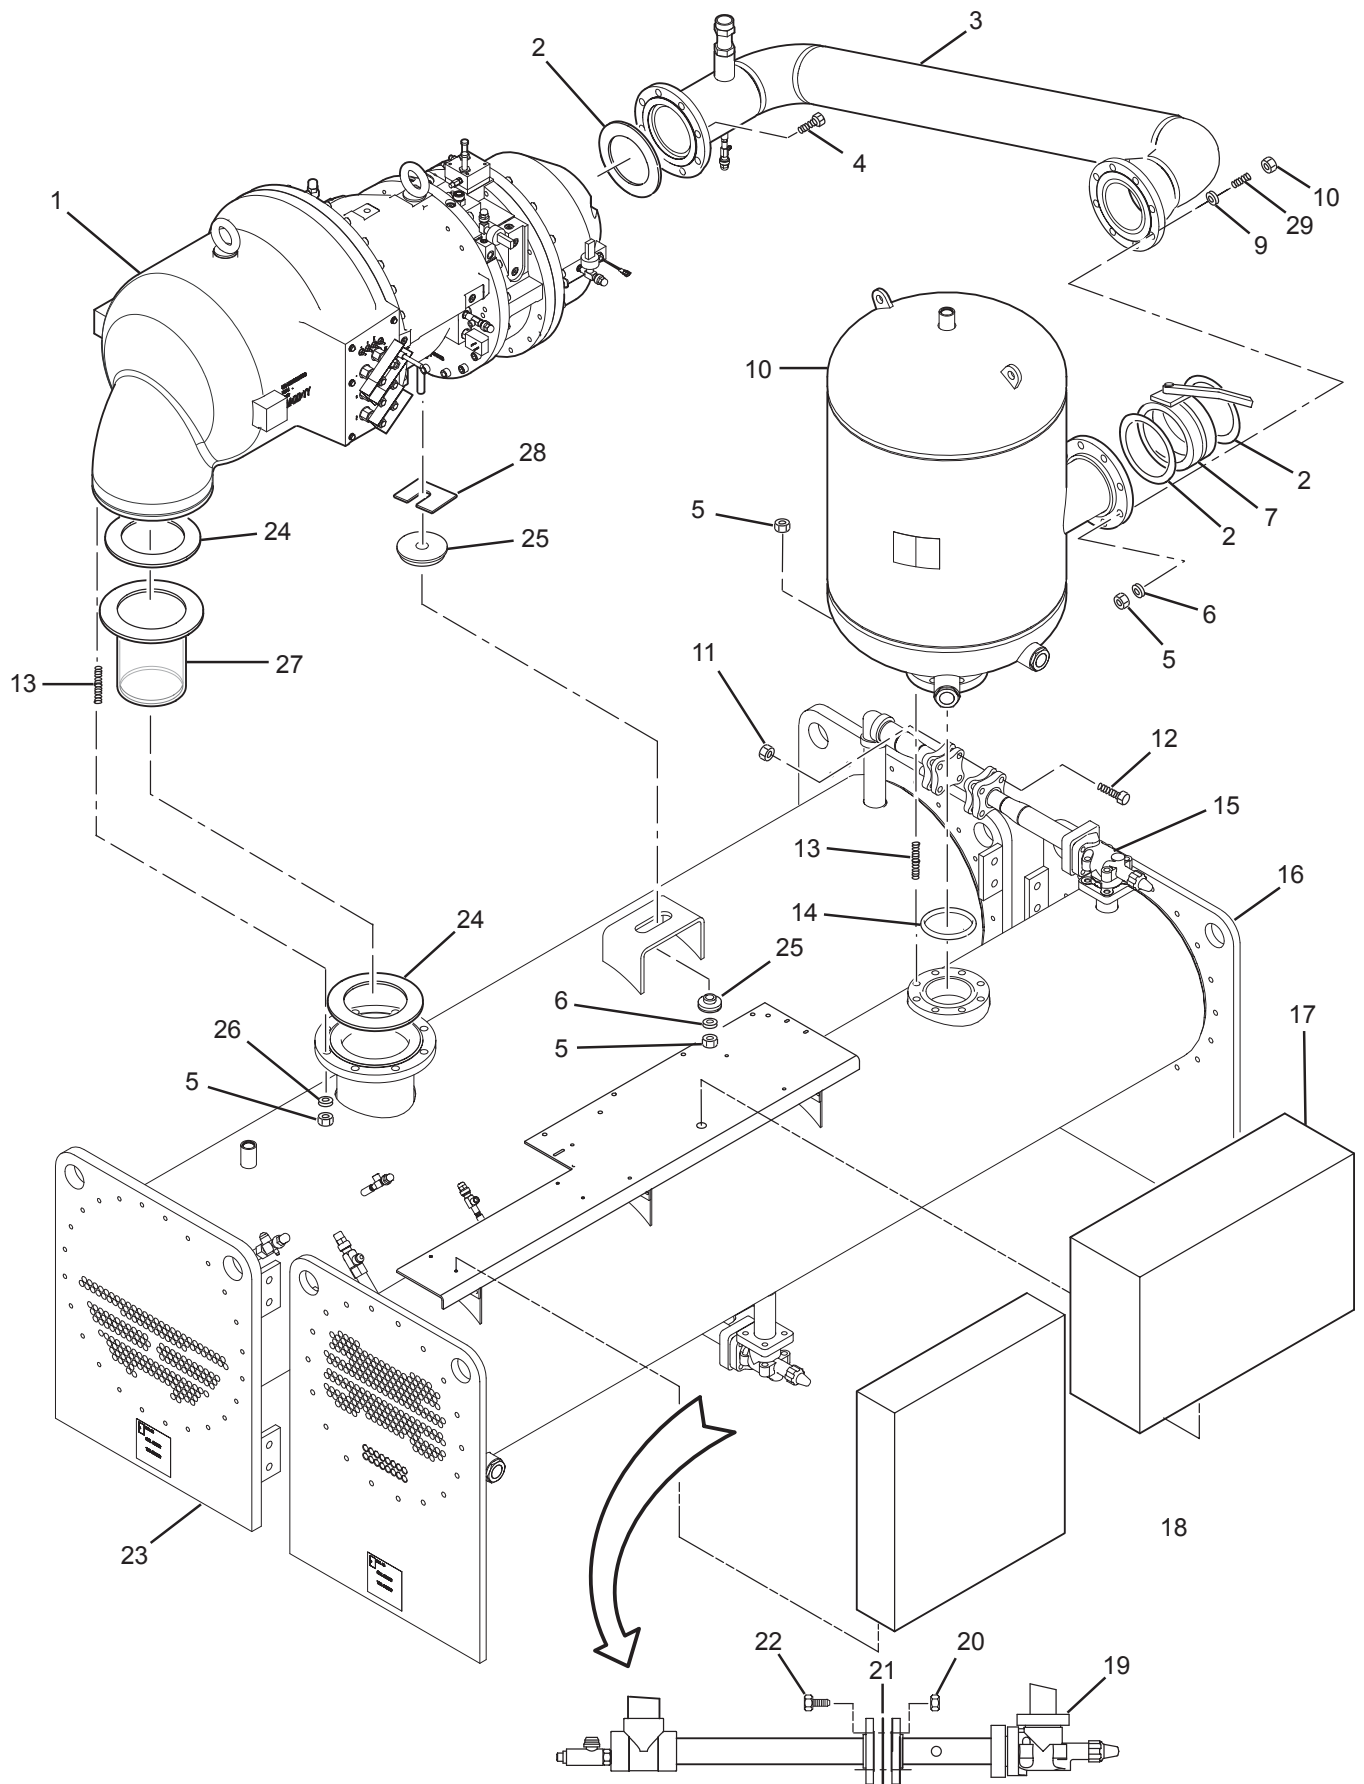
FORM 7 FIELD ASSEMBLY - EXPLODED VIEW
